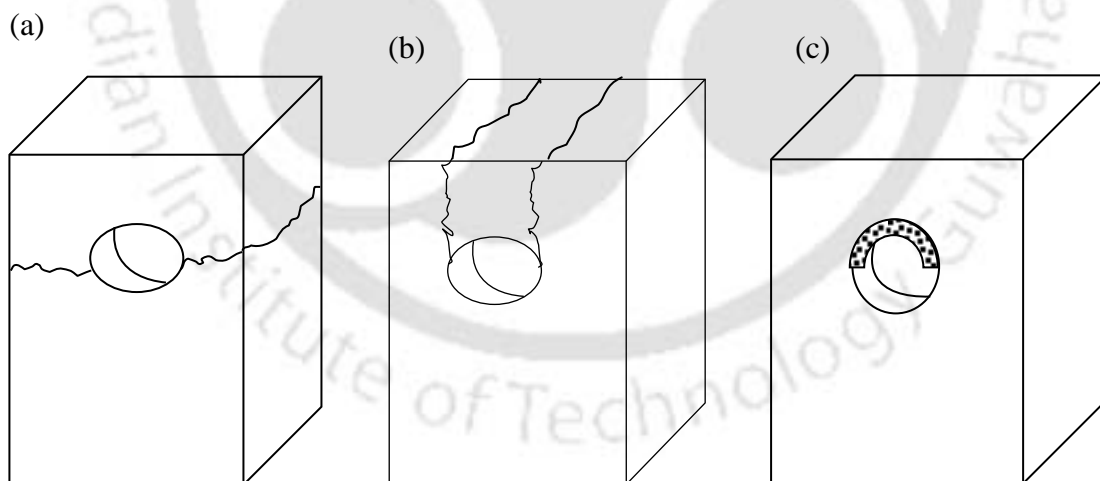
Major types of joint failure (a) net-tension failure (b) shear-out failure (c) bearing failure
